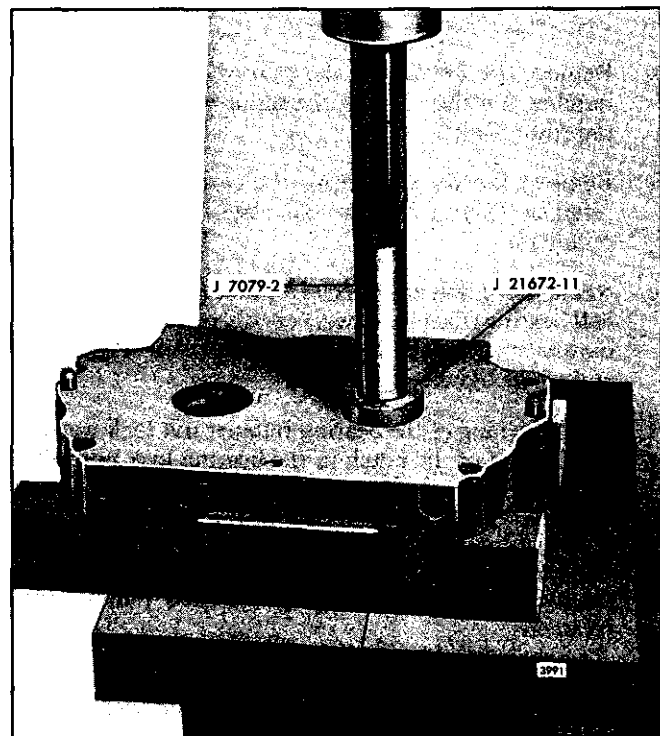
Removing Oil Seal and Roller Bearing from Rear End Plate (Former Blower) Using Tool J 7079-2
